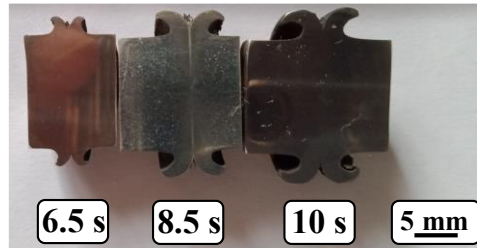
Micro-hardness test pieces were carried out over ± 4 and 4.5 mm on both sides for axial direction and welding interface respectively
